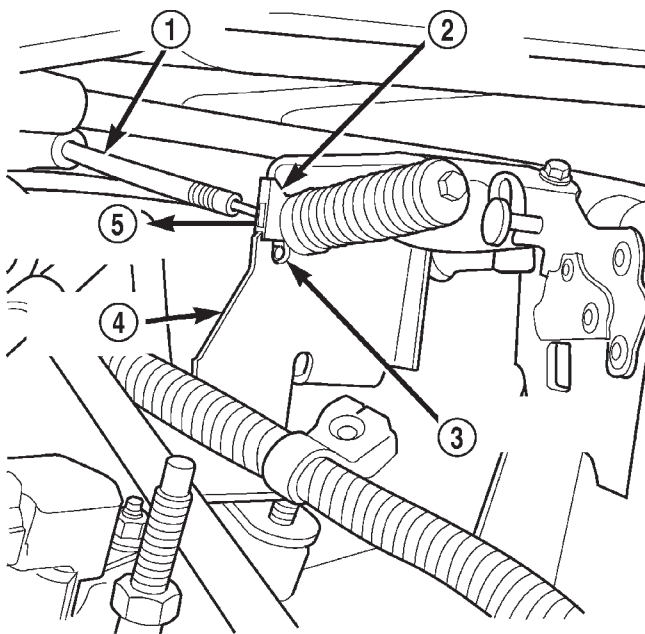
Cable Connectors at Bell Crank—4.7L V-8 Engine
